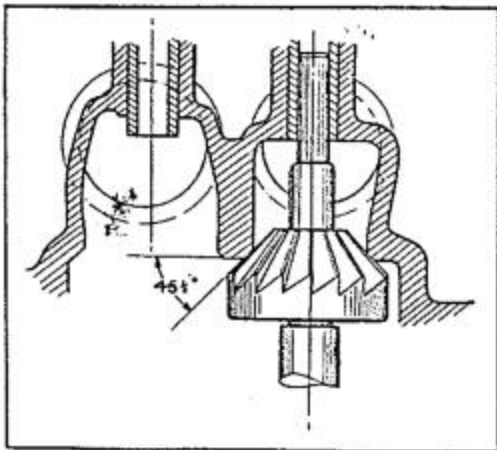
Recutting valve seating with $44\frac{1}{2}^\circ$ cutter
